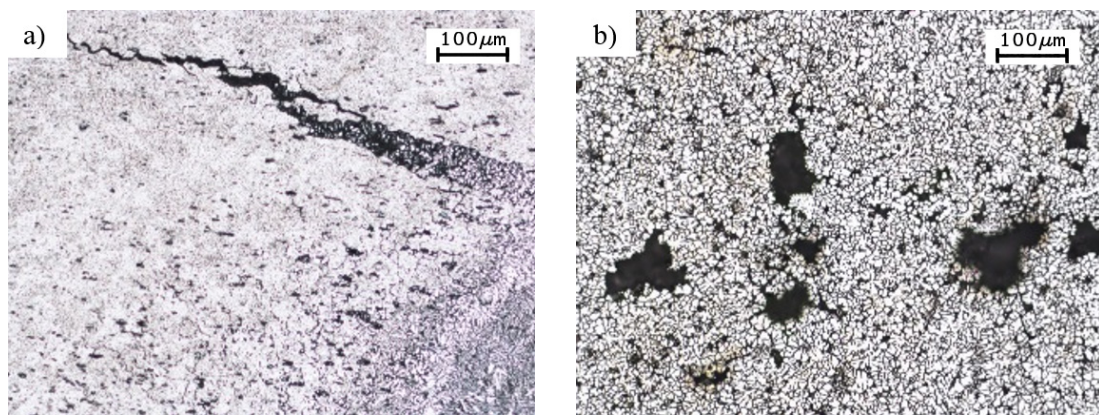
a) cracks in sheet EN AW5754 H24; b) porosity in welding nugget, etched with Ma1Al
